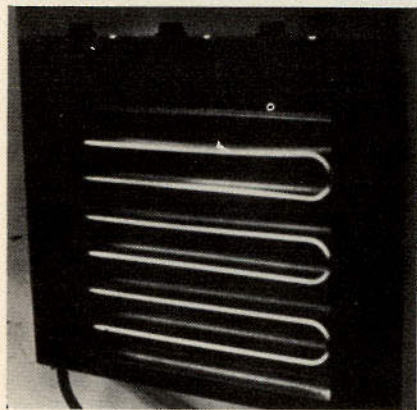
Calrod radiant preheater (Hollis Engineering).
